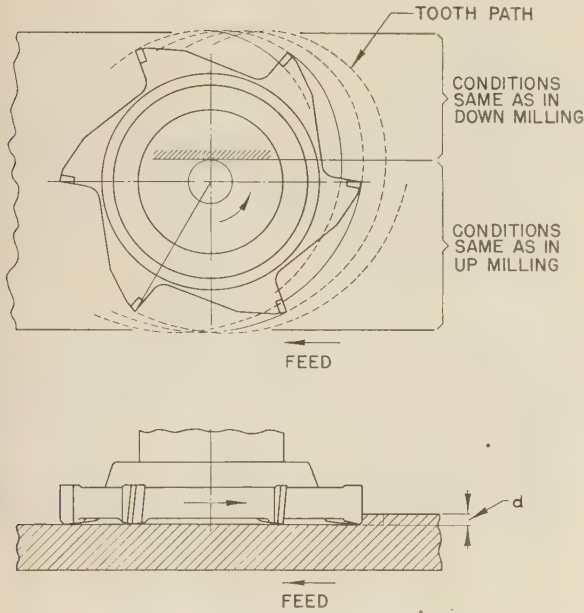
PATH GENERATED BY A FACE-MILL TOOTH
